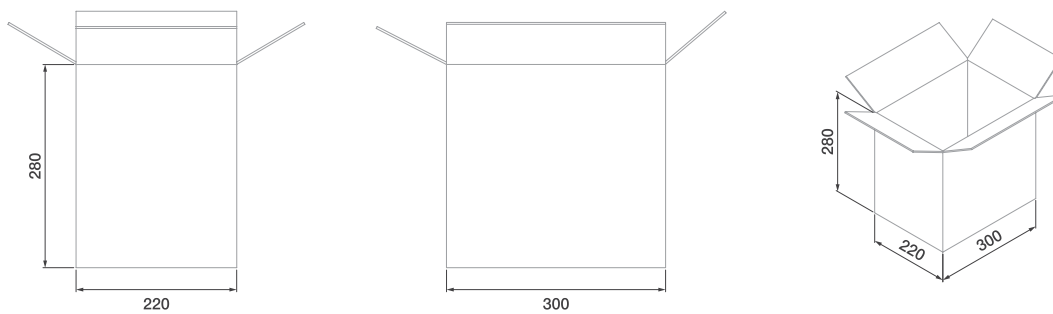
STANDARD PACKAGING BOX DIMENSIONS
